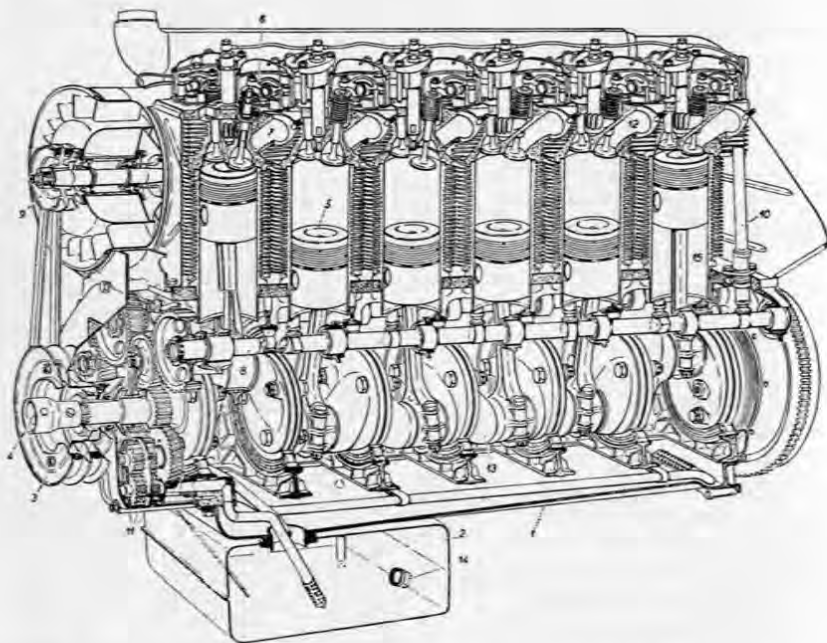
Sectional view of the Praga engine mounted in the V3S lorries.
